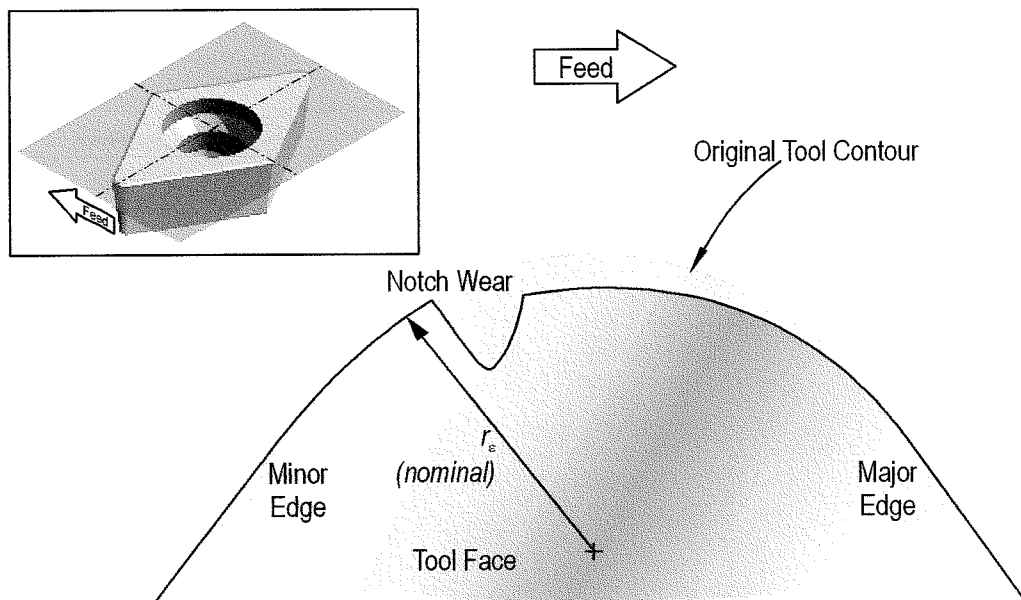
Tool wear in section parallel to the Tool Reference Plane P_r
